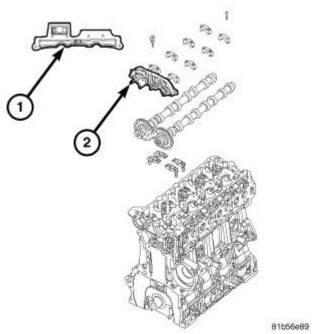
Front Camshaft Bearing Journal Courtesy of CHRYSLER LLC
